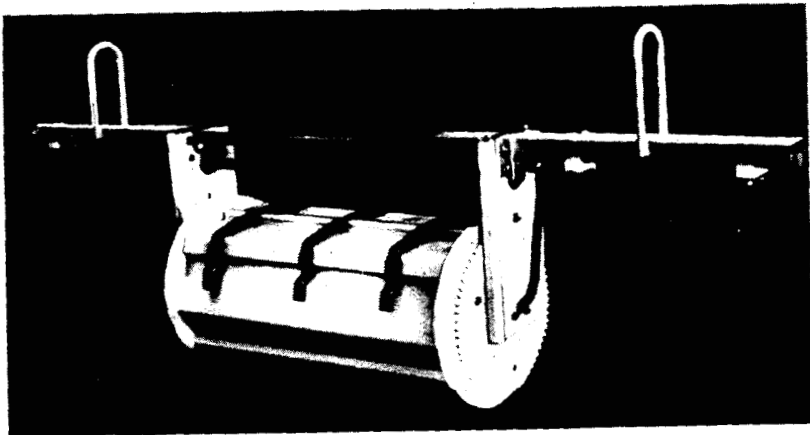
Barrel assembly equipped for use in a rack plating line.
